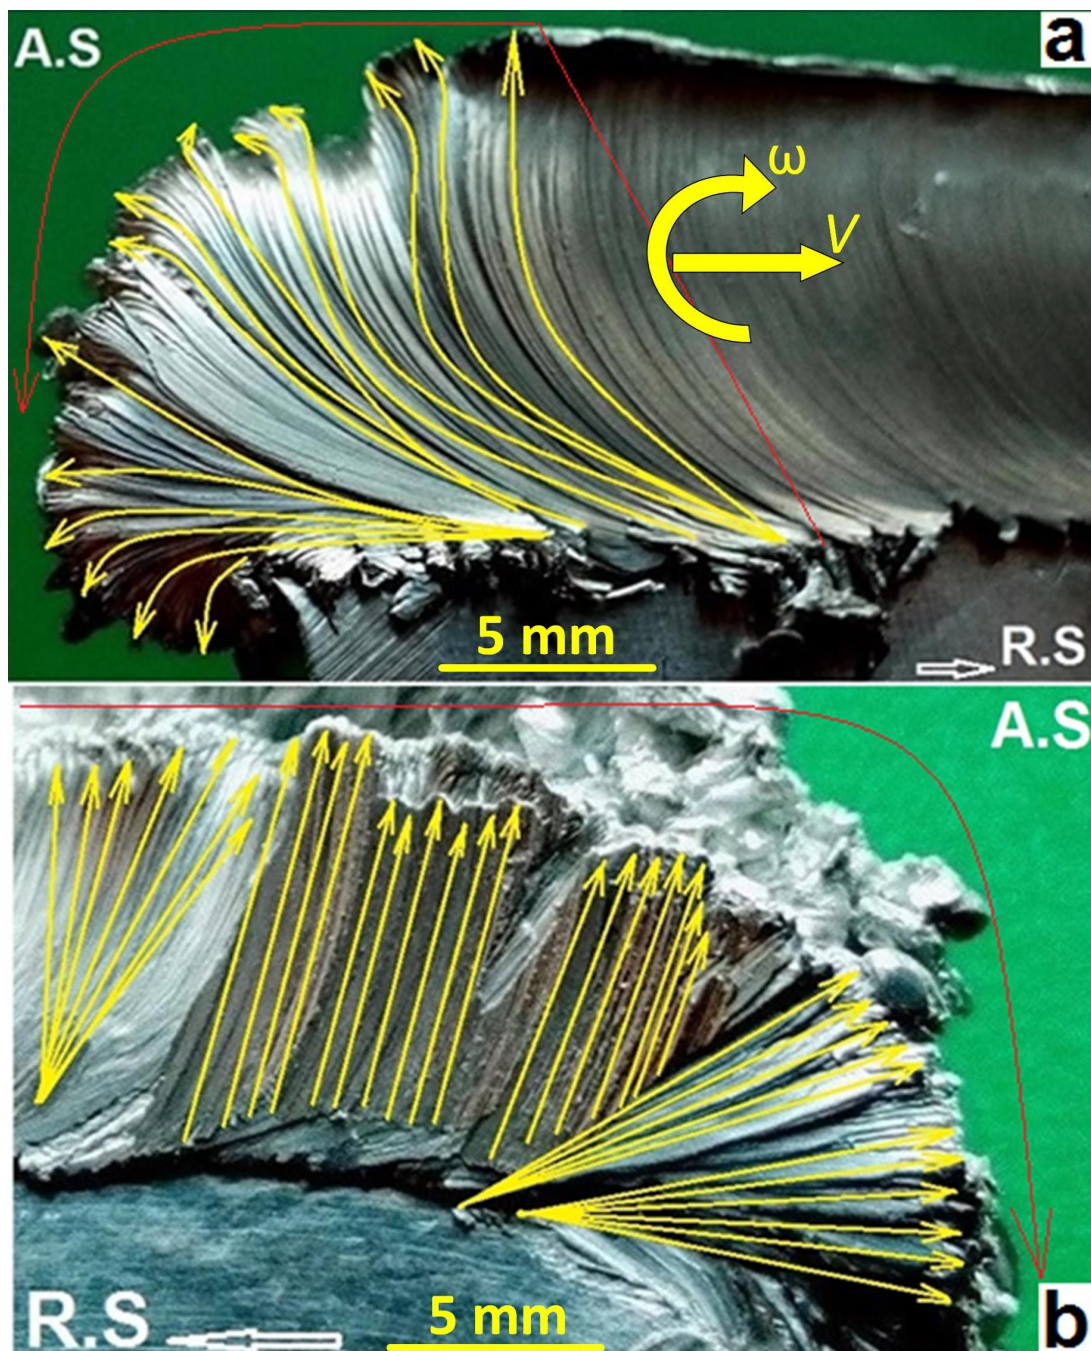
Flow patterns of plastic deformation in the entry zone; aluminum weld sample. (a) Top surface, (b) bottom surface.
